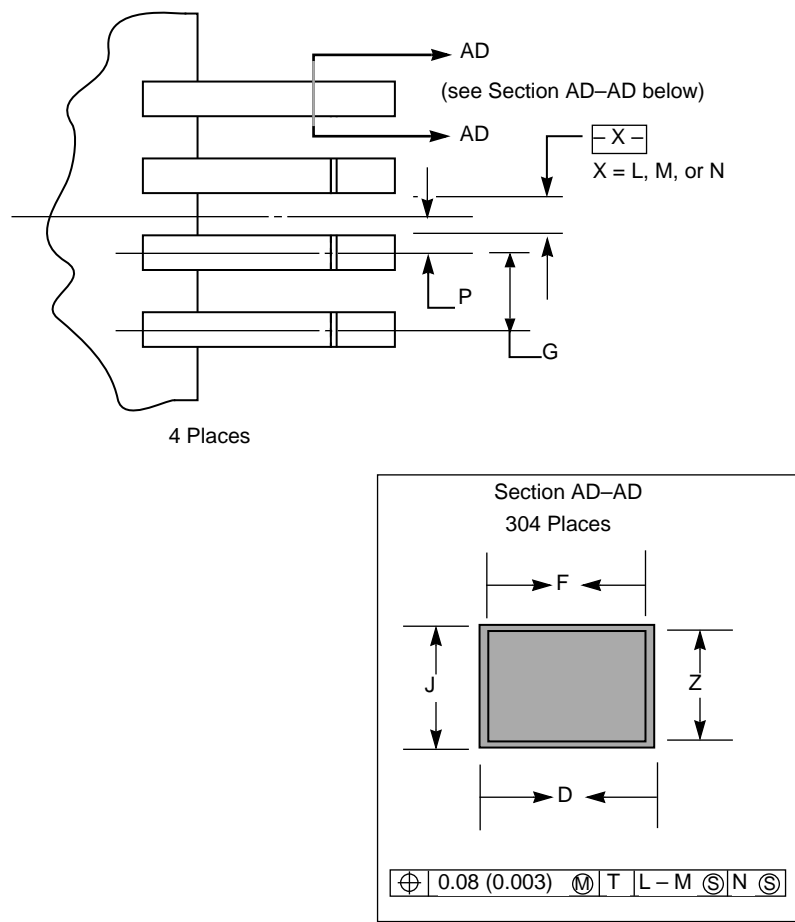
Wire-Bond CQFP Mechanical Dimensions—View AC
